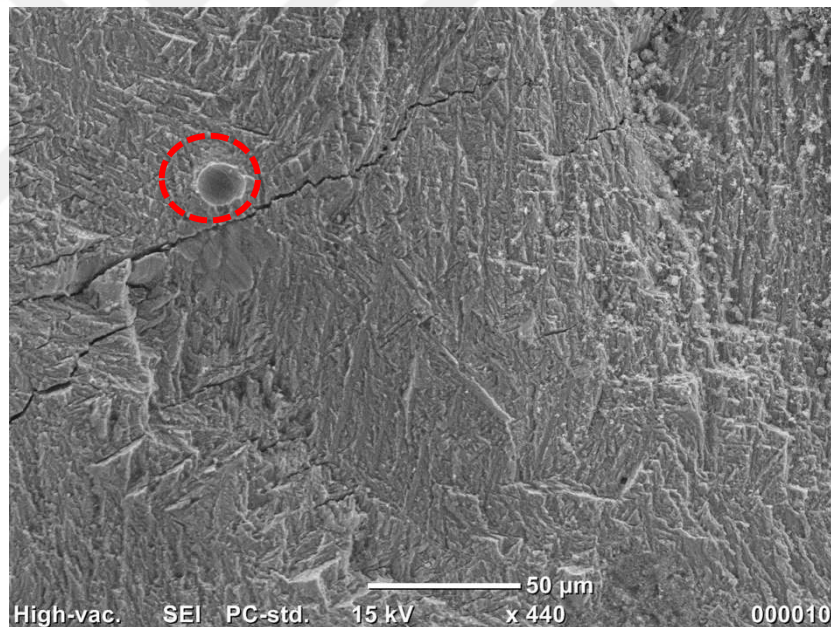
Annealed fatigue specimen fracture surface unmelted powder defect example
